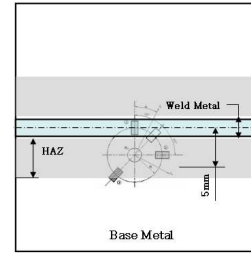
Strain gauge location for the welding residual stress measurement
